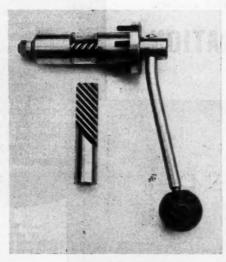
Woodworth "Cone-Lok" Unit for Assembly in Fixtures
